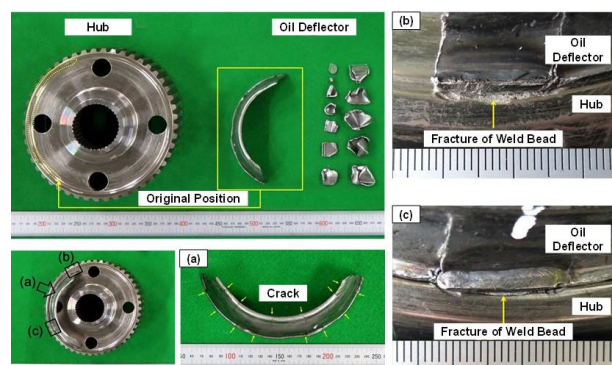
Destroyed hub assembly separated into hub and oil deflector
